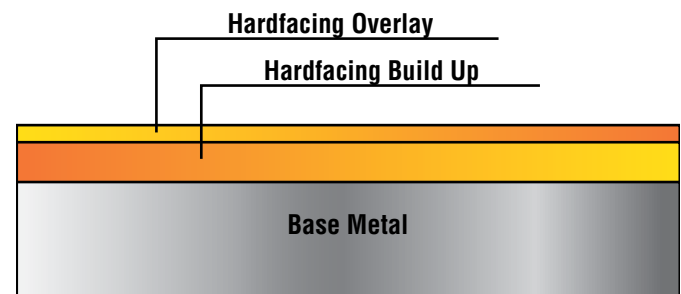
Hardfacing Overlay And Build-Up Can Be Used Together To Rebuild Parts To Size And Give Them Additional Resistance To Wear.
